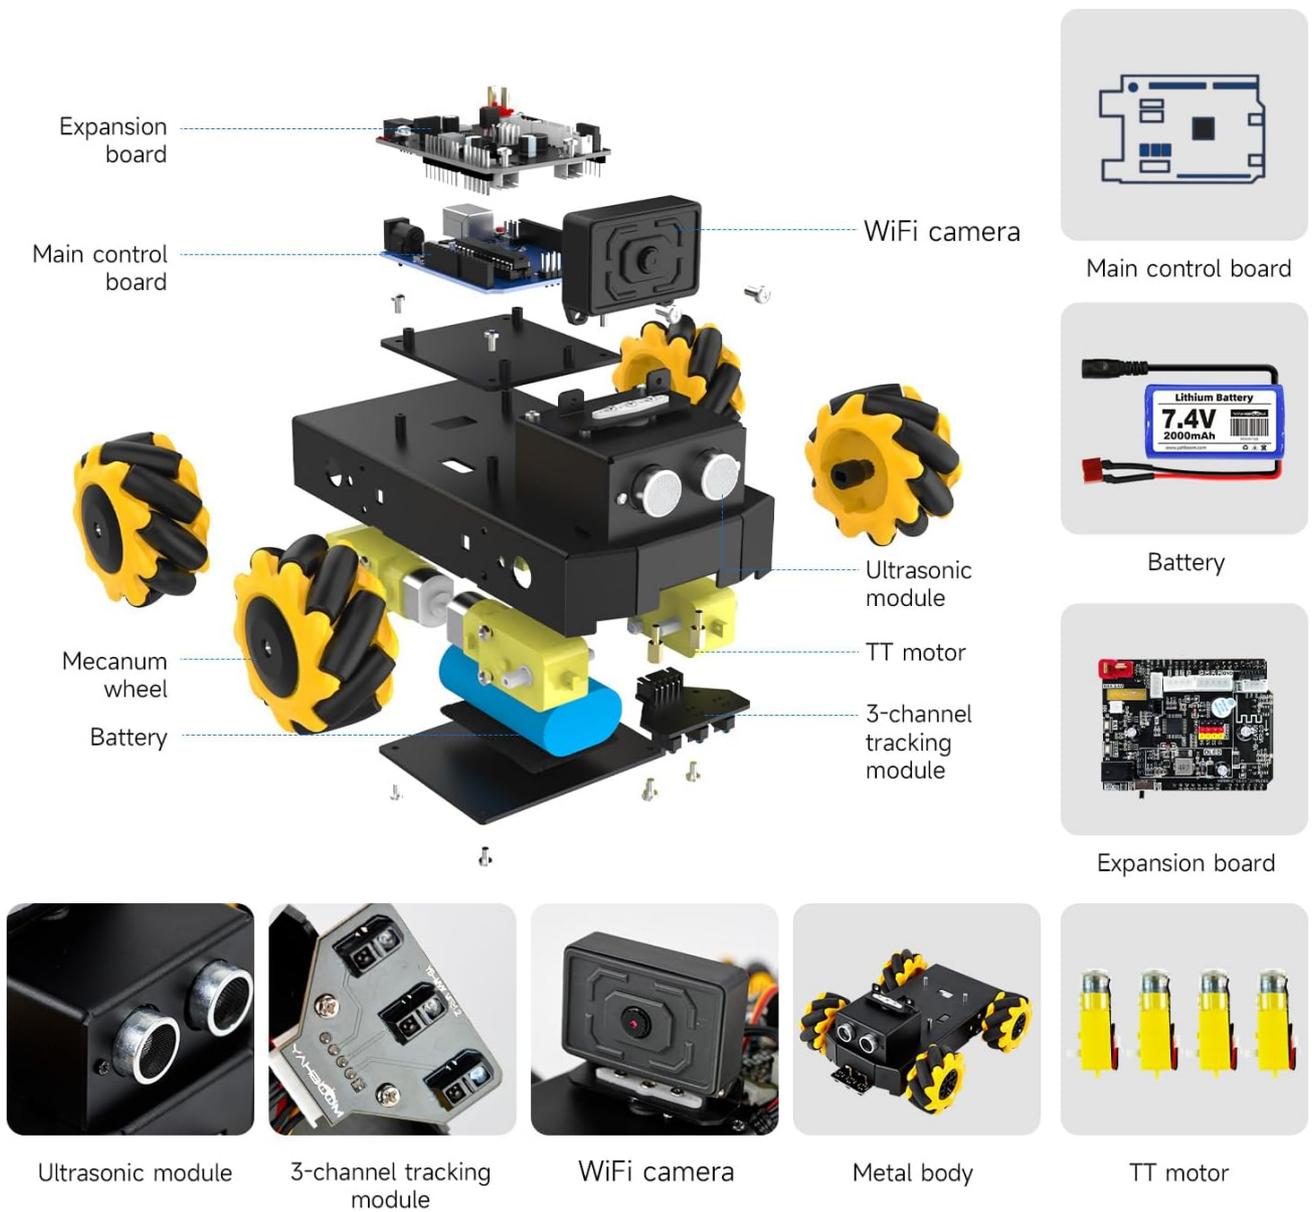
Exploded view showing the main control board, expansion board, WiFi camera, ultrasonic module, Mecanum wheels, battery, and TT motors.
